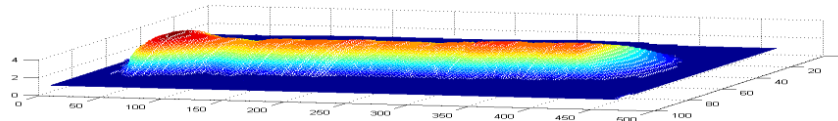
Reconstruction in 3D of the weld bead.
